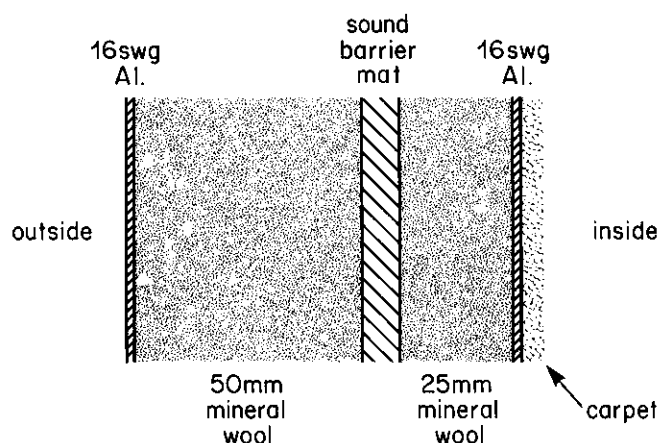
Example of the construction of an outside broadcast vehicle wall.
